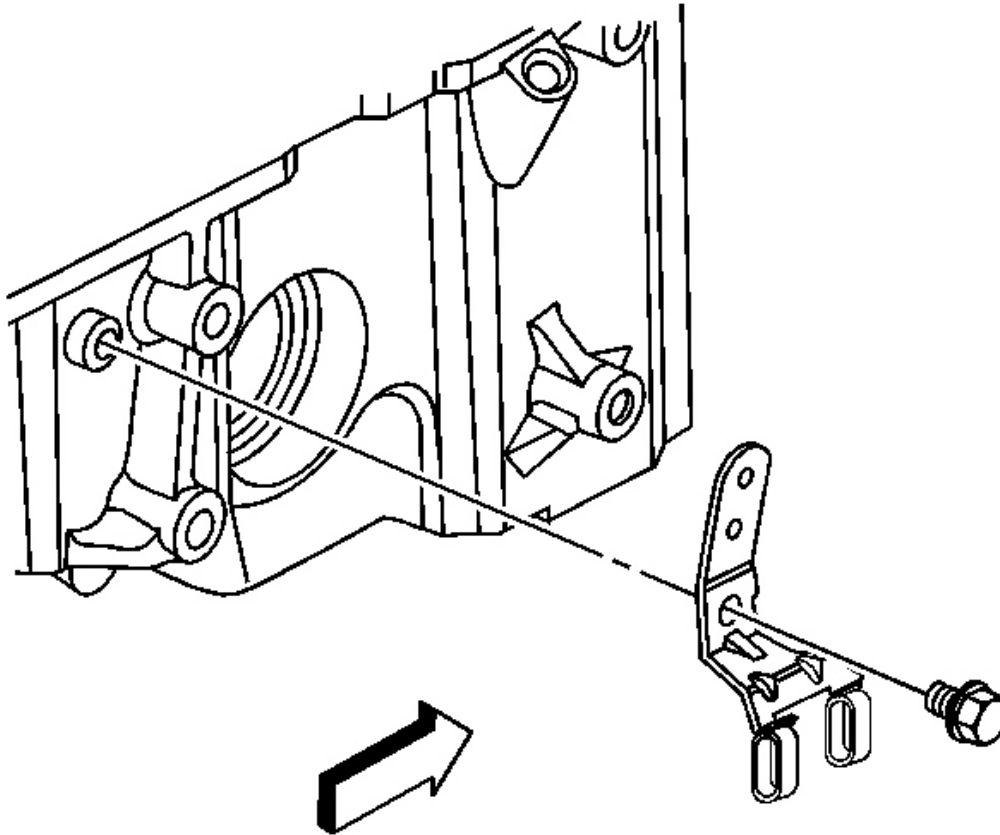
View Of Transmission Oil Cooler Line Retaining Bracket & Bolt
